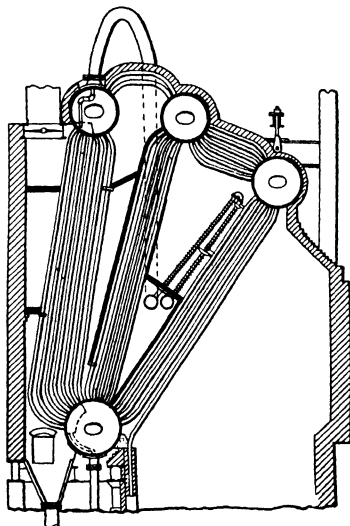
Four-drum bent-tube boiler with upper front drum submerged and finned tube superheater. (*Foster Wheeler Corporation.*)
